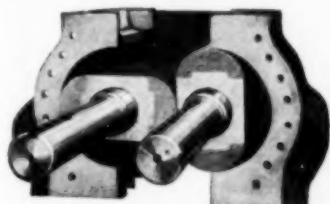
PUMP WITH HEAD PLATE REMOVED
